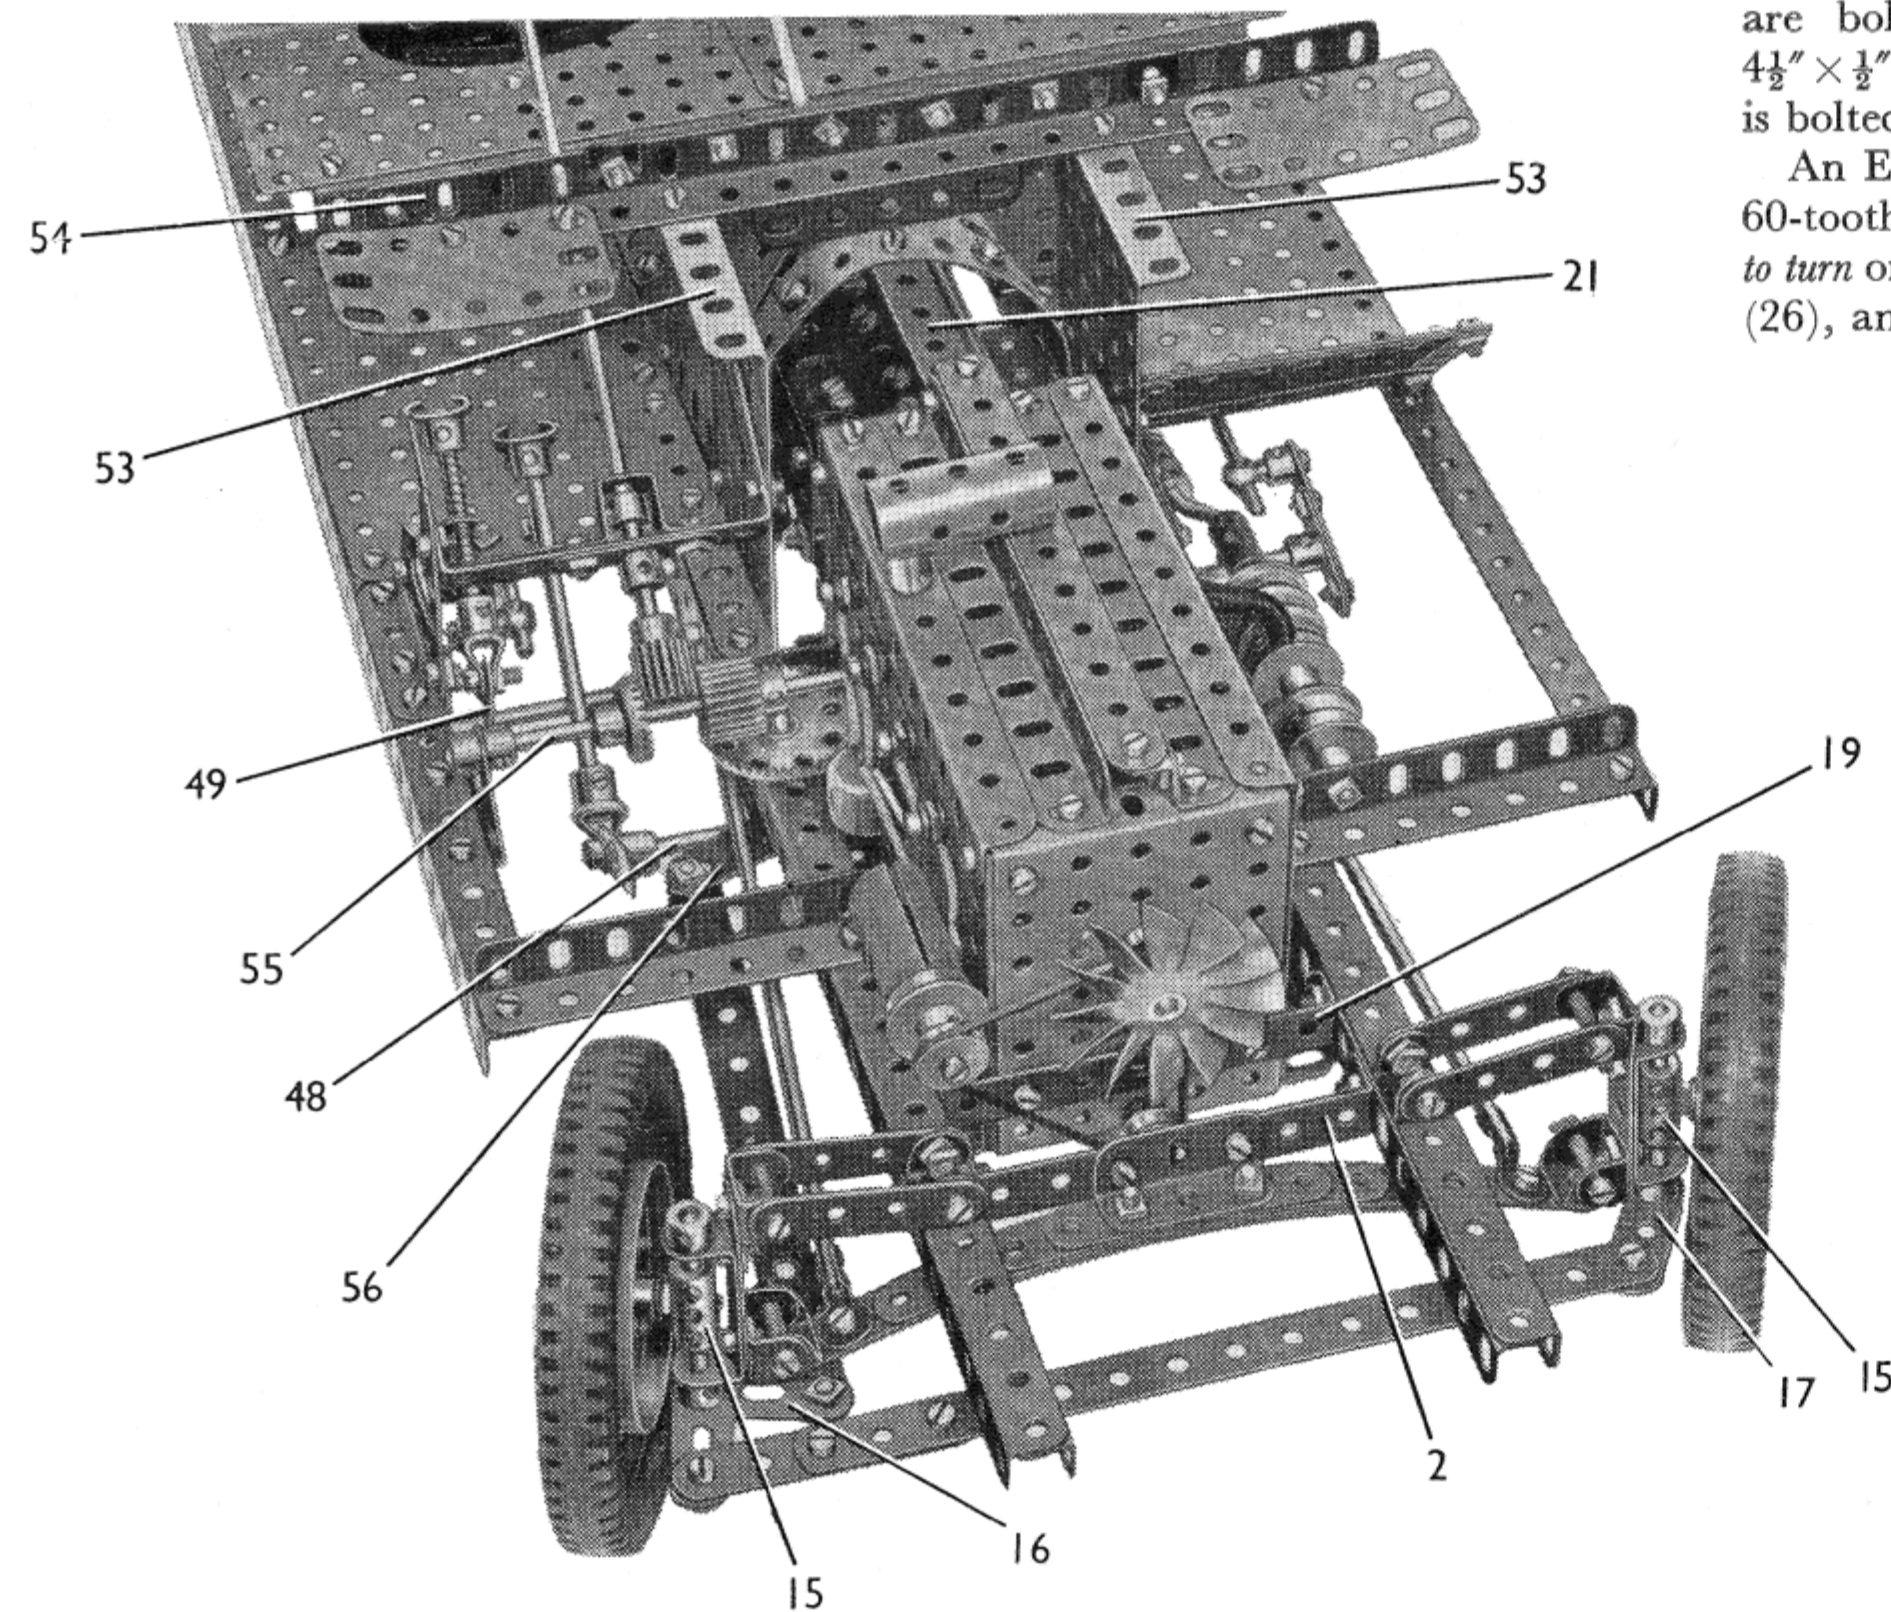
A front view of the chassis showing the steering mechanism in detail
